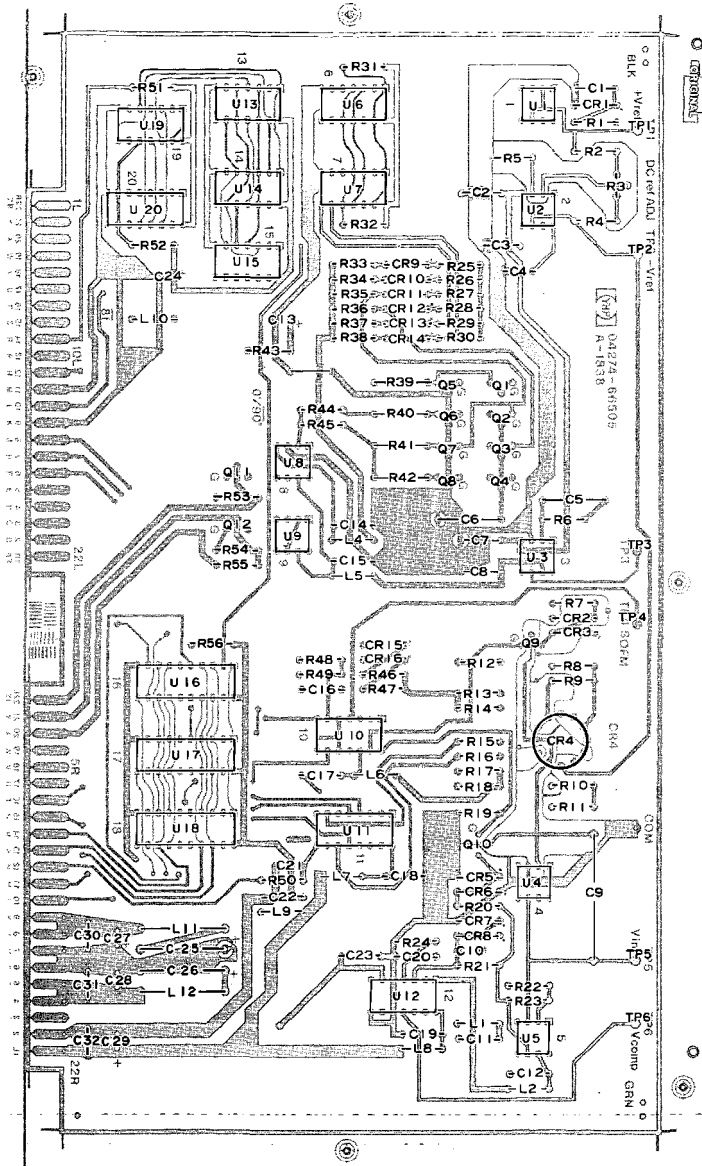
A5 A-D CONVERTER ASSEMBLY COMPONENT LOCATIONS
